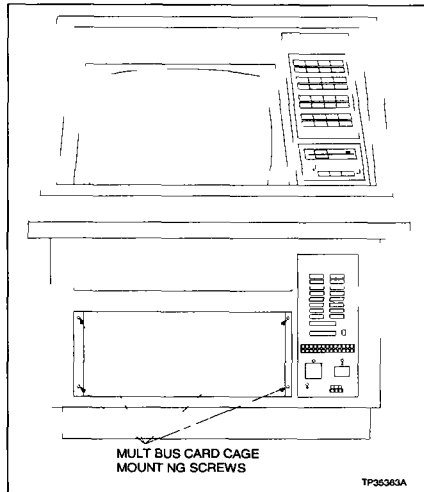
7 Multibus Card Cage Removal for IIOIS40/IIOIC402 Consoles
